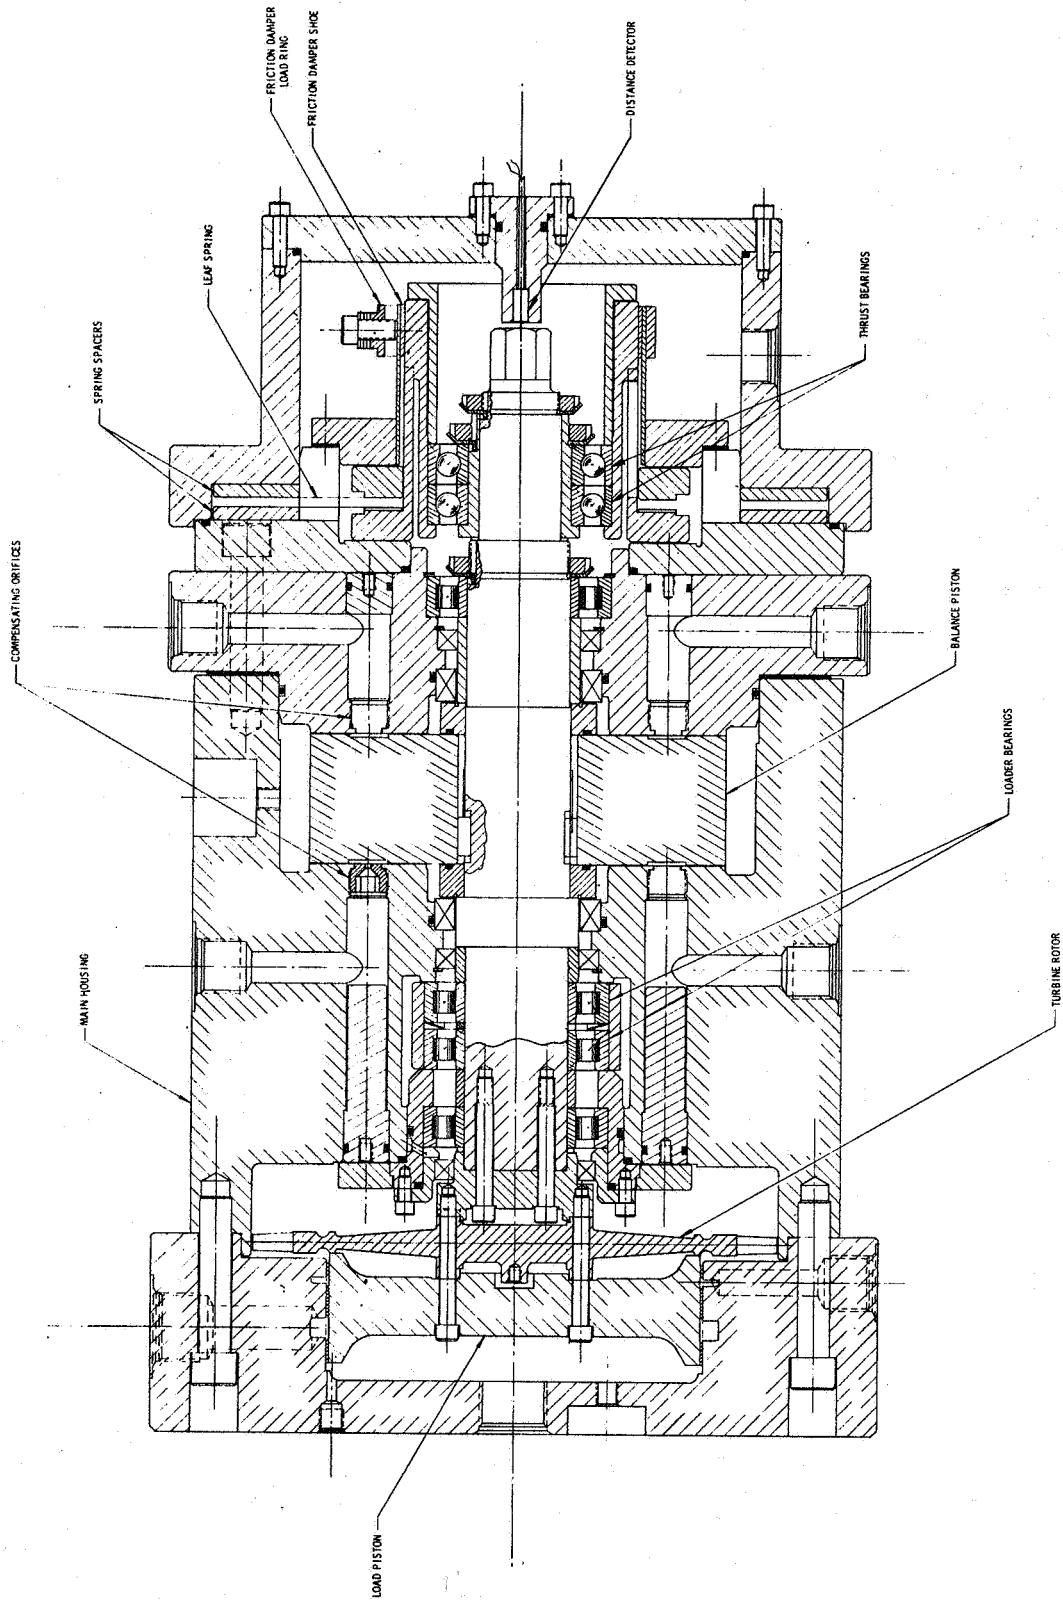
Thrust Balancer Test Assembly, Parallel Flow Configuration
